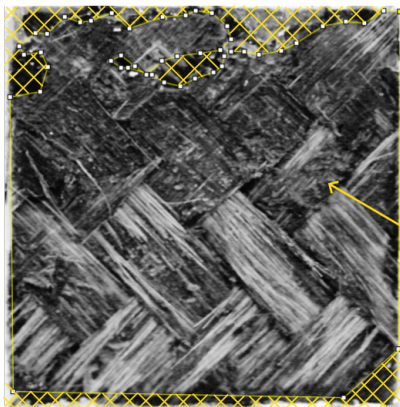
Silhouetting of the welded interface using ImageJ
